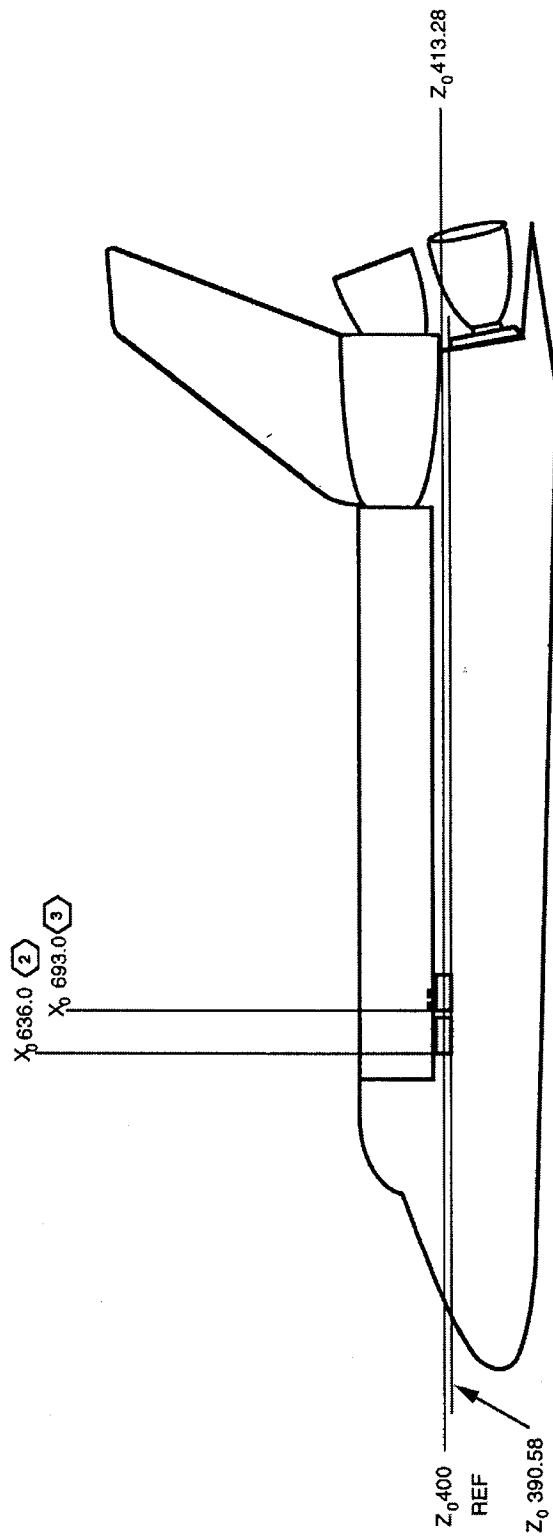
HITCHHIKER-S AVAILABLE SIDEWALL MOUNTING LOCATIONS
